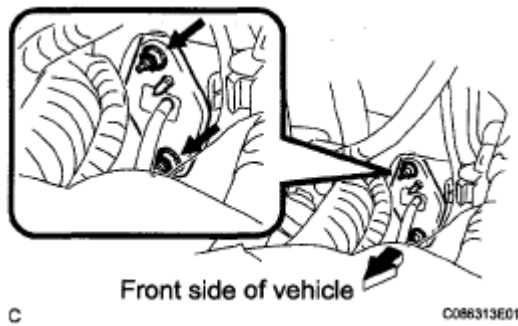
Locating Transmission Control Cable Assembly Nuts
